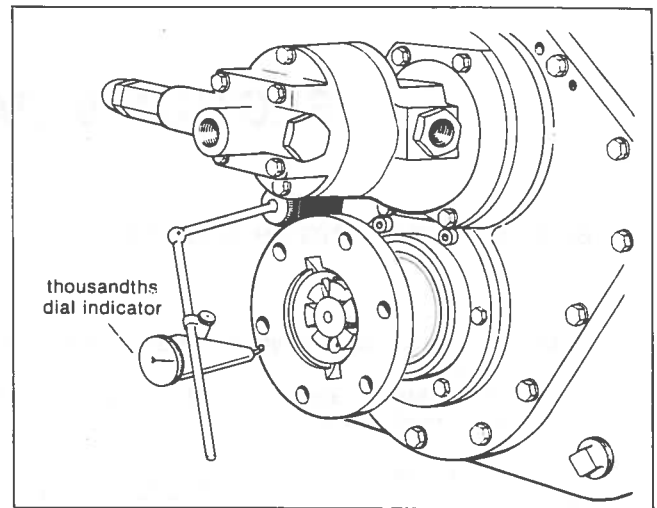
Checking Output Coupling Mounting Face For Trueness.
